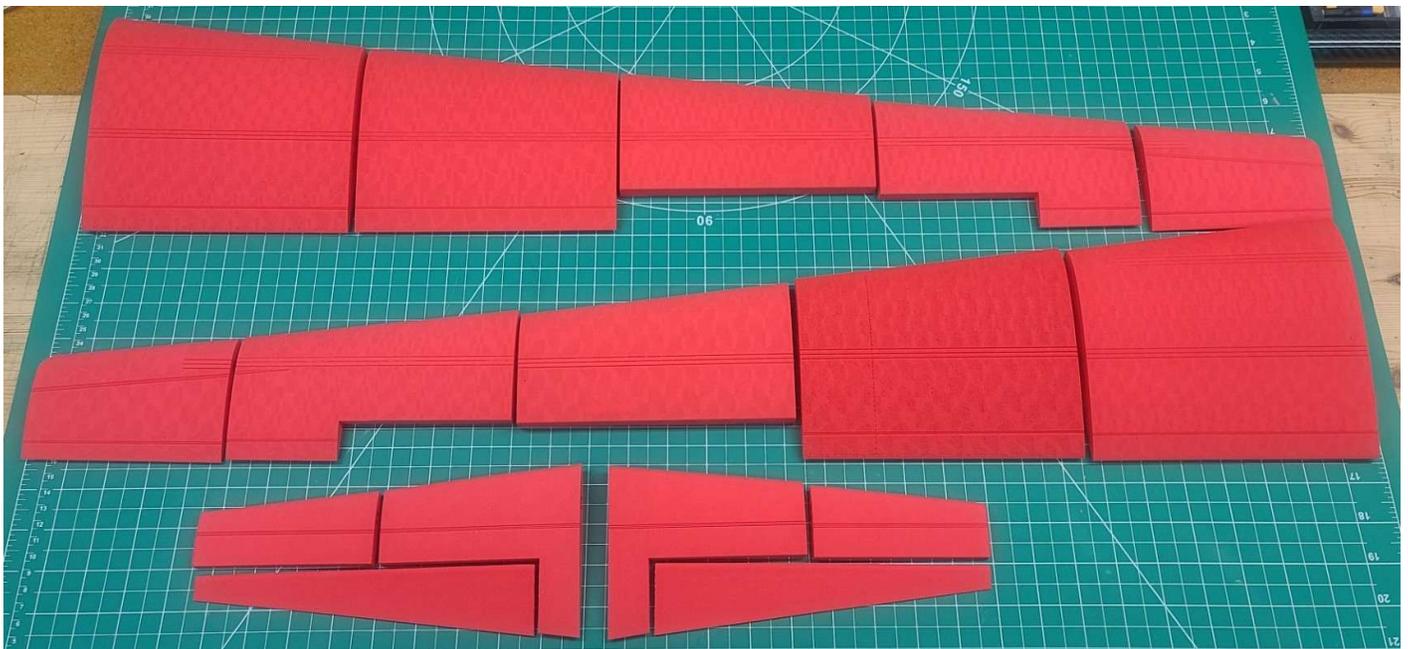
RQ-4 3D Printed Wing & V-Tail LW-PLA Parts
